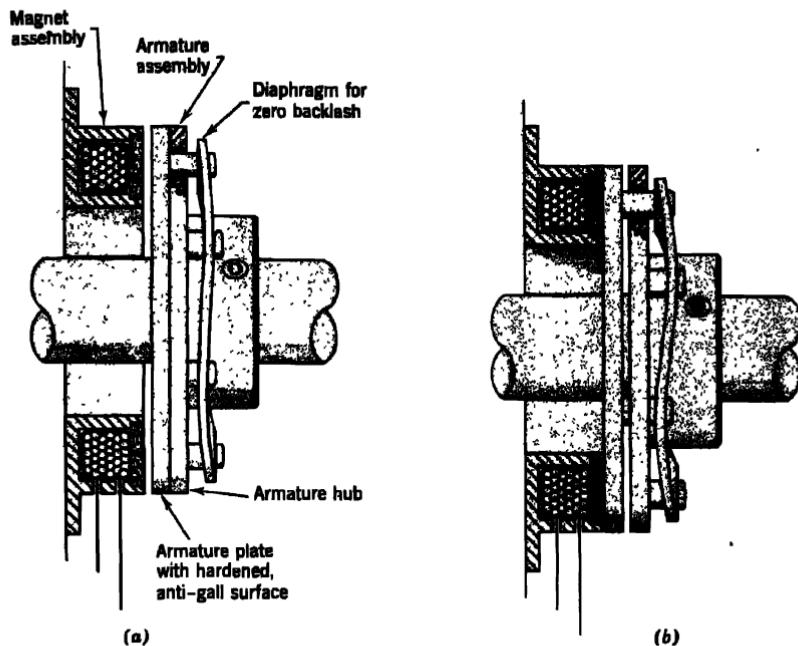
Magnet brake. (a) Deenergized. (b) Energized. (Courtesy of Simplatrol Corporation.)
